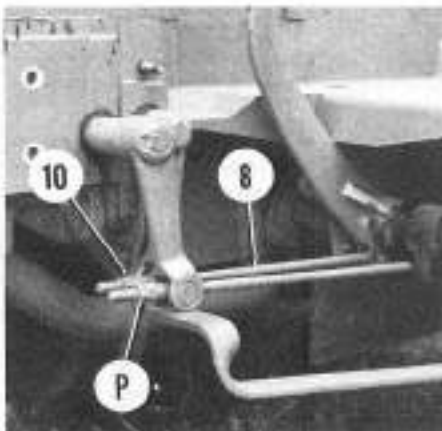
On series 9, 12 and 14 tractors having separate transmission and pto cross shafts, clutches are adjusted by turning adjusting nuts (10). Inner rod (8) is transmission clutch rod. Outer rod (P) is pto clutch rod.
